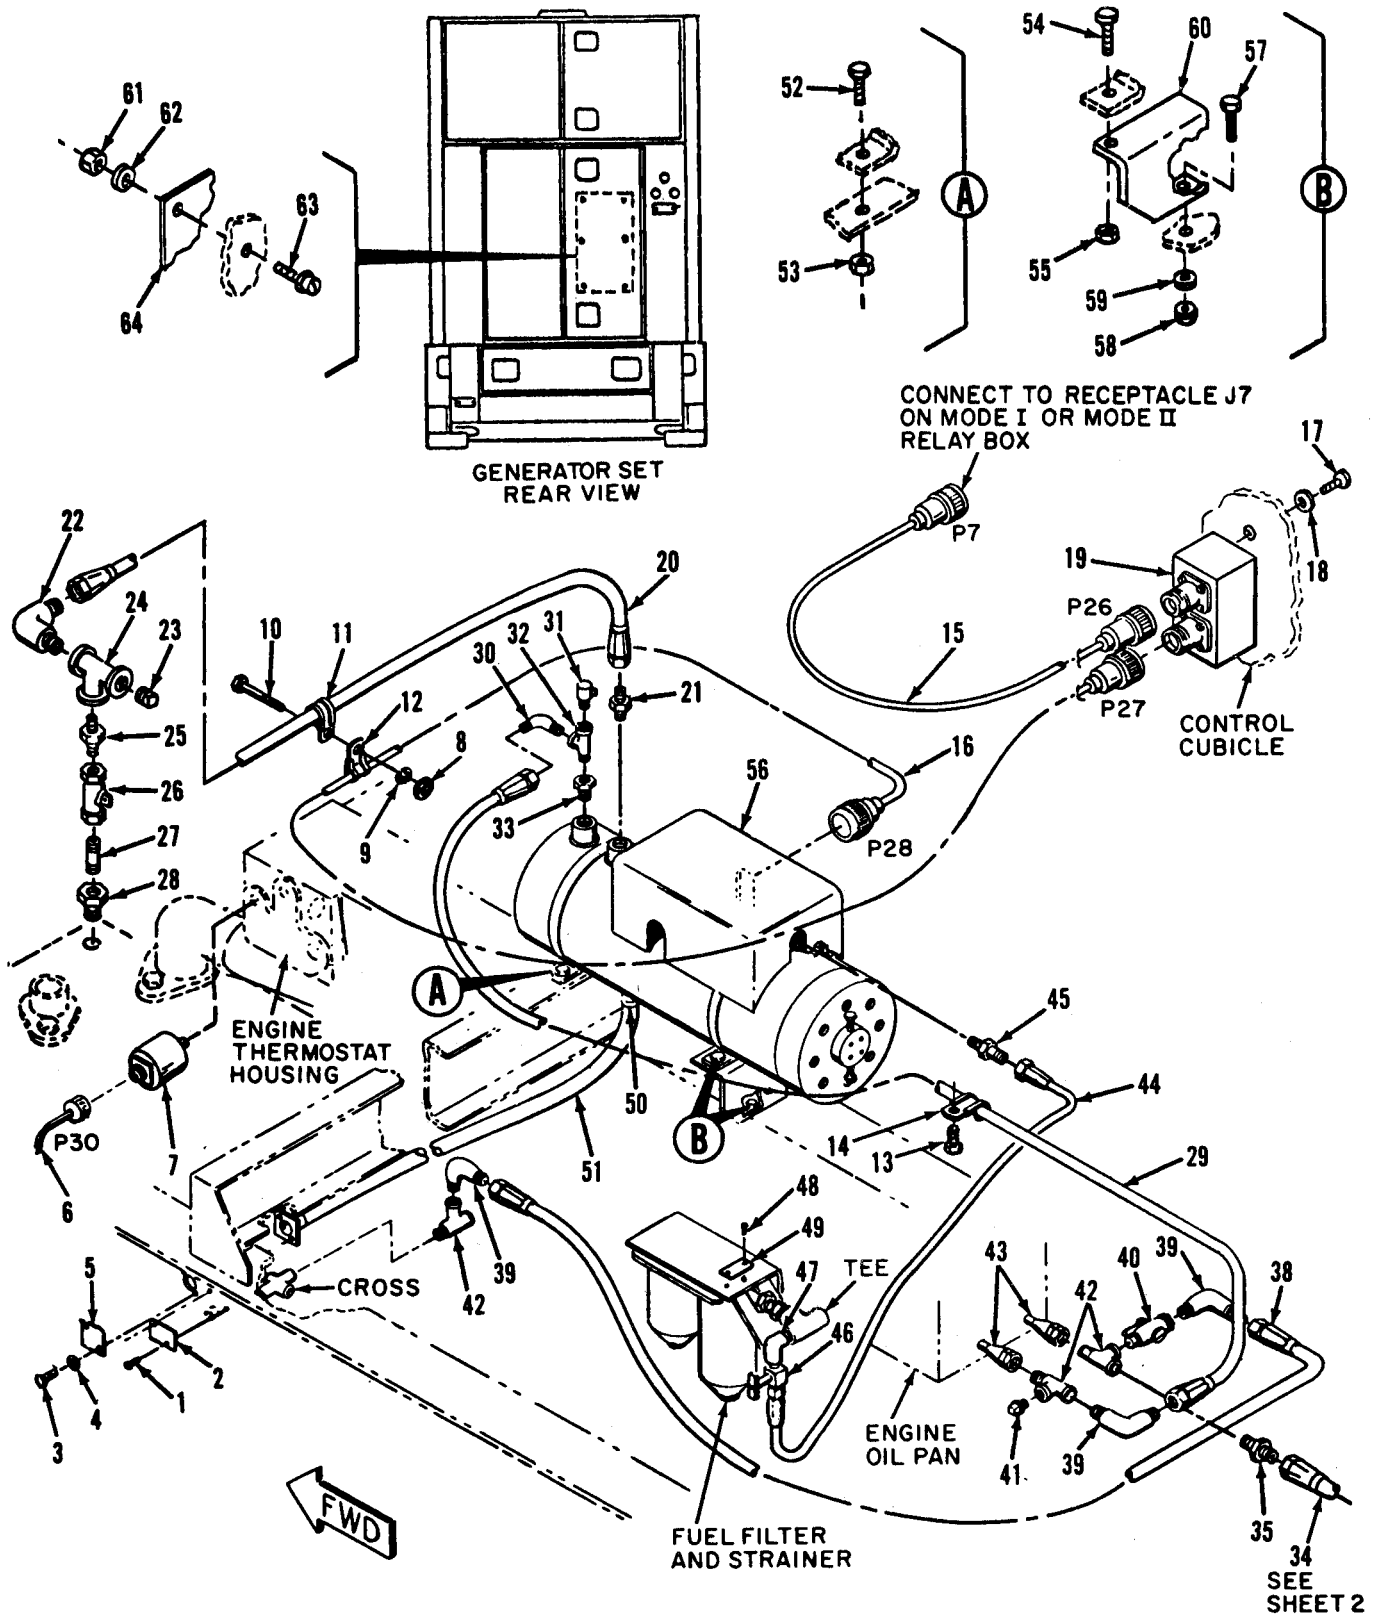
Fuel burning winterization kit, removal and installation (sheet 1 of 2)
